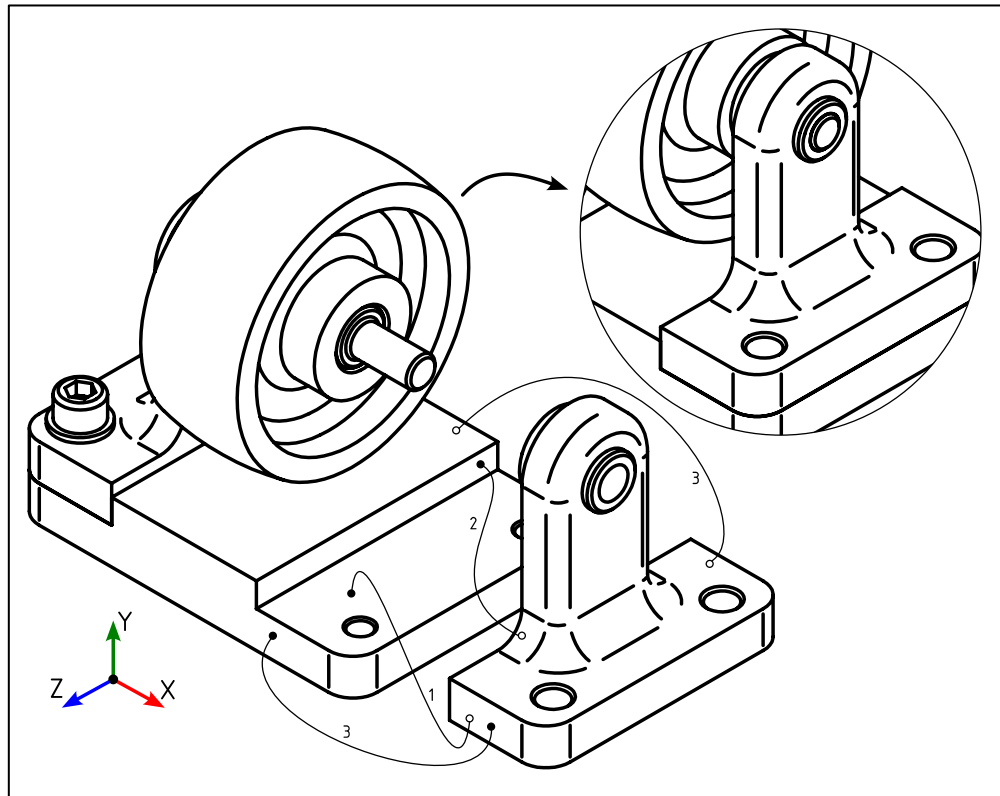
assembly of the second “riser_asm” sub-assembly.
